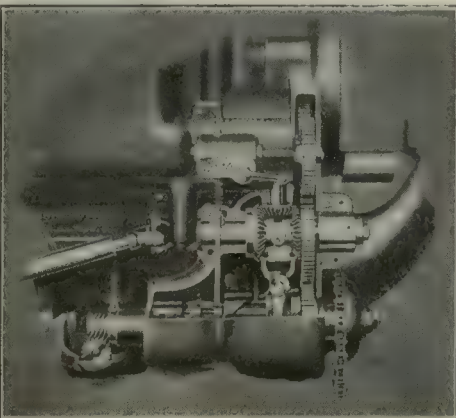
REVERSE GEARING AND CAMS, CONTROLLING STOP AND REVERSE MOVEMENTS
